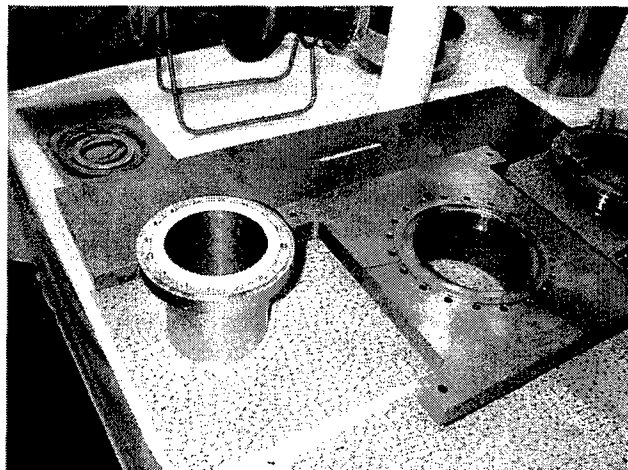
Conflat™ 304 stainless-steel flanges brazed to Nb tubes. The large square flange is a tuner flange; the round one is a power coupler flange.
